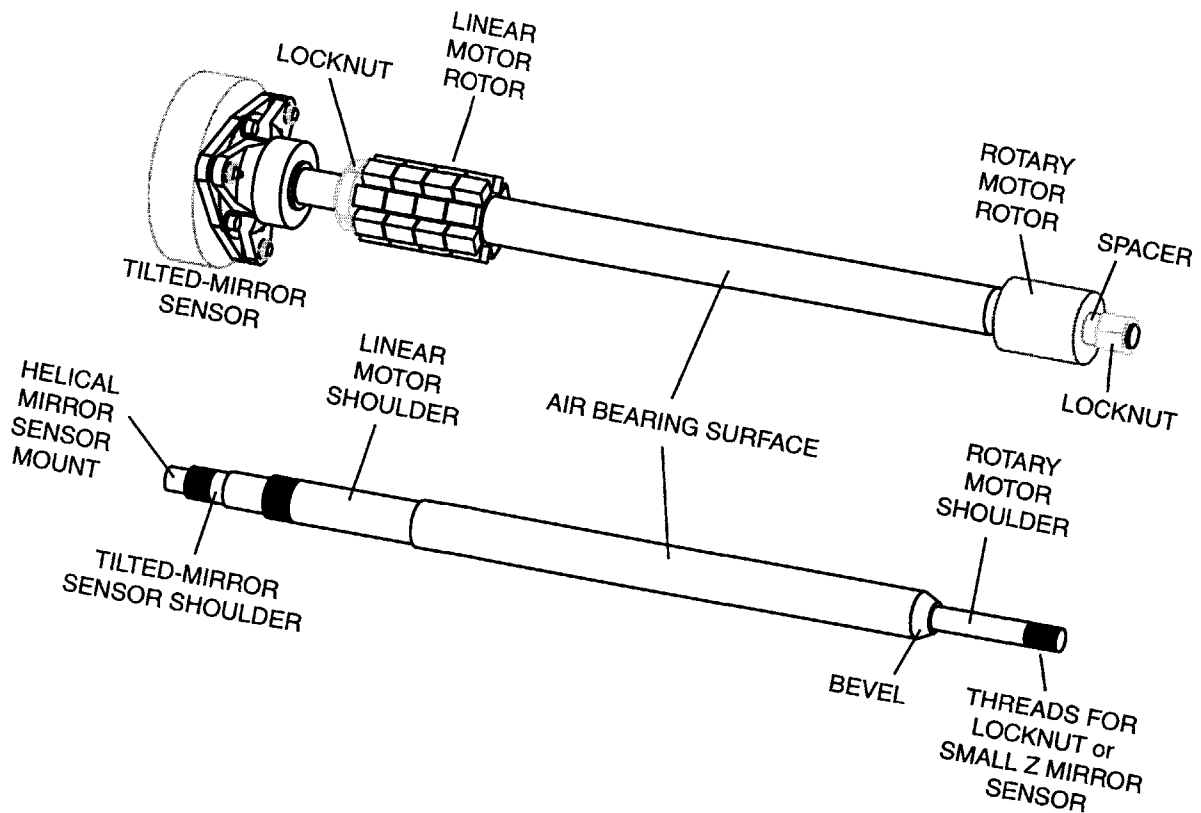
Shaft geometry and assembled components. The shaft is 0.75 inch in diameter in the center and 15.23 inches long. Figure D-1 shows a detailed mechanical drawing of the shaft.
